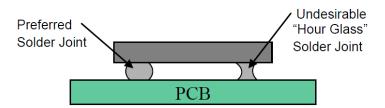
Side View of DFN 8 Attachment Illustrating Preferred and Undesirable Solder Joint Shapes
